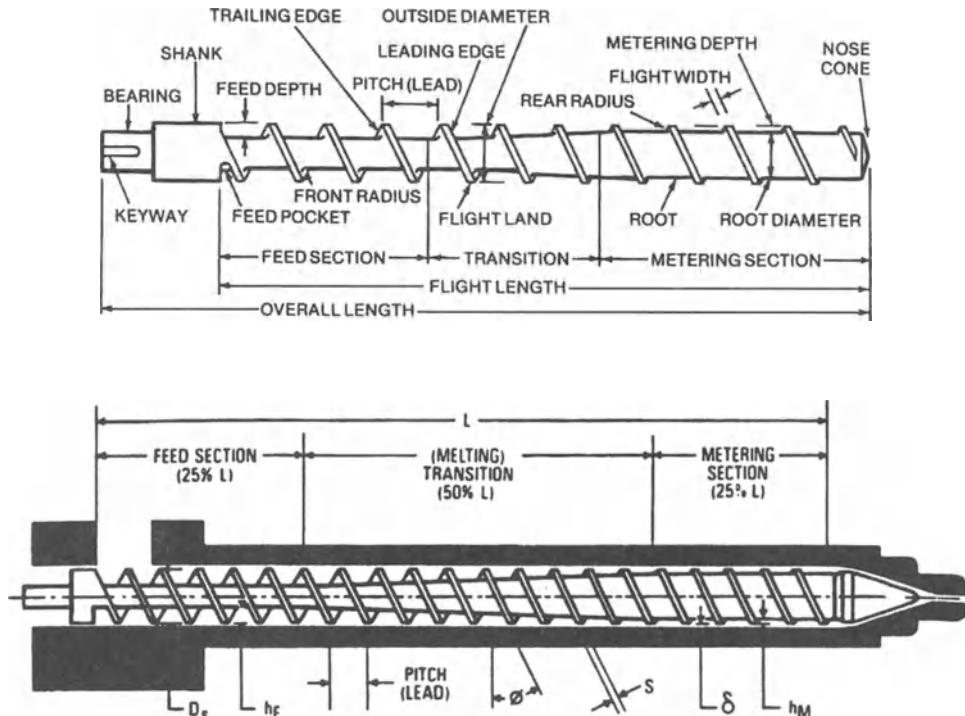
Typical metering-type screw with barrel: D_s = screw diameter (nominal); ϕ = helix angle = 17.8° ; s = land width = 0.250 in.; h_f = flight depth (feed); h_M = minimum flight depth for metering = 0.22 in.; L = overall length; δ = radial clearance = 0.005 in.; L/D = ratio of length to diameter = 16 to 24; h_f/h_M = compression ratio = 2.0 to 2.2.
